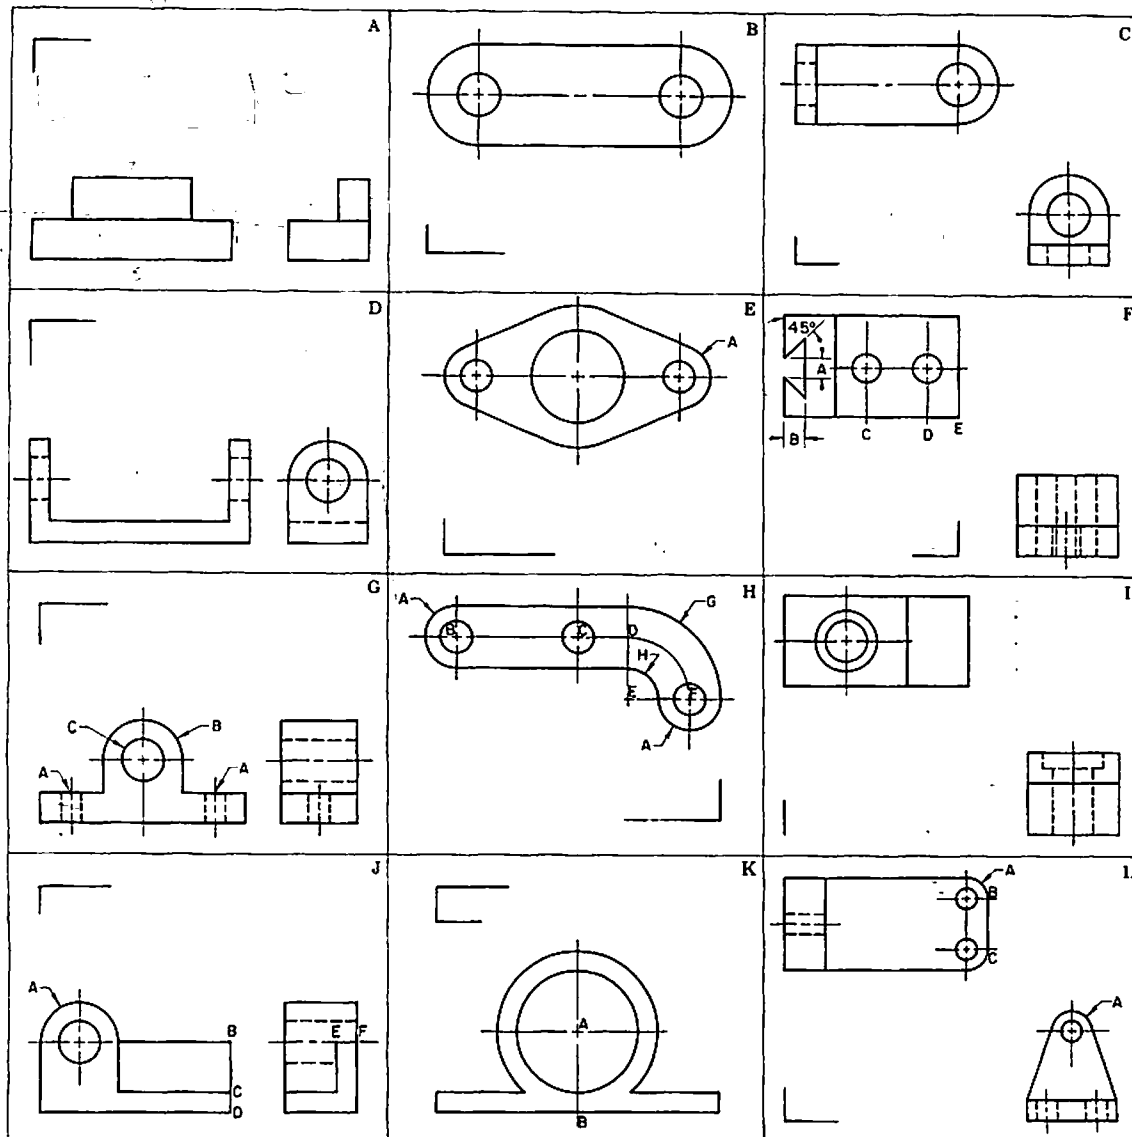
Two- and three-view problems. Problems A through L each have one view missing. Draw the view or views given and complete the remaining view in the proper shape and location. Scale: full size or as assigned. Do not dimension unless instructed to do so.
